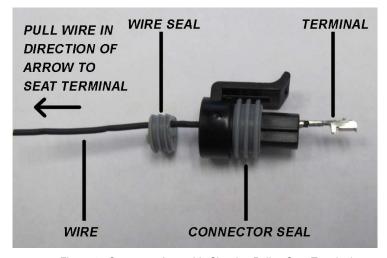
Connector Assembly Showing Pull to Seat Terminal
